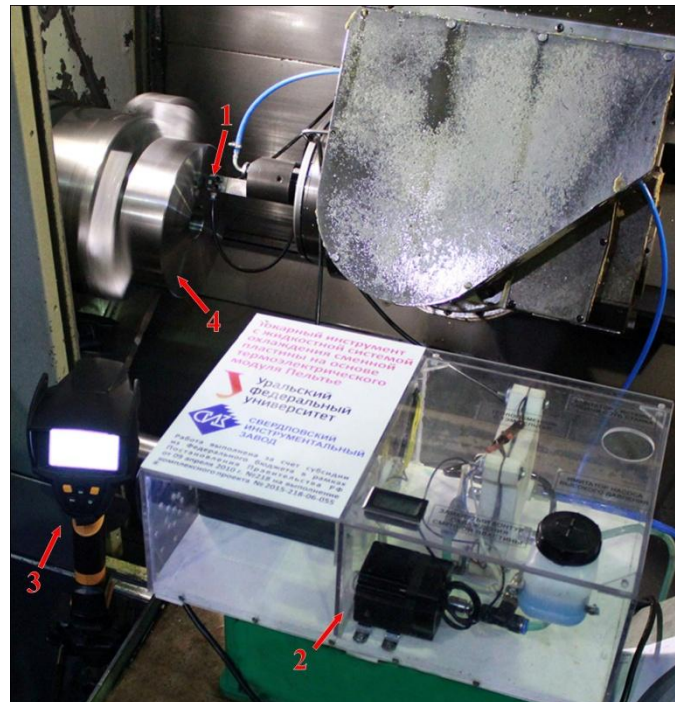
Turning tool with a closed loop system for cooling a replaceable cutting insert on an Okuma Multus B300 lathe: 1 – tool holder with the RCT; 2 – cooling system; 3 – thermovision camera; 4 – workpiece
